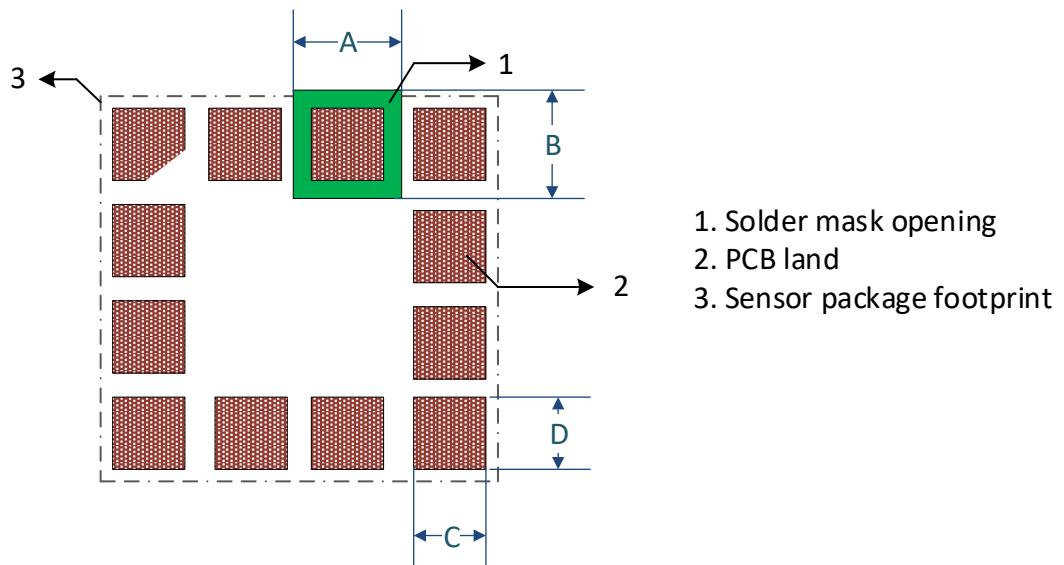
PCB land and solder mask recommendations for sensors with LGA package
